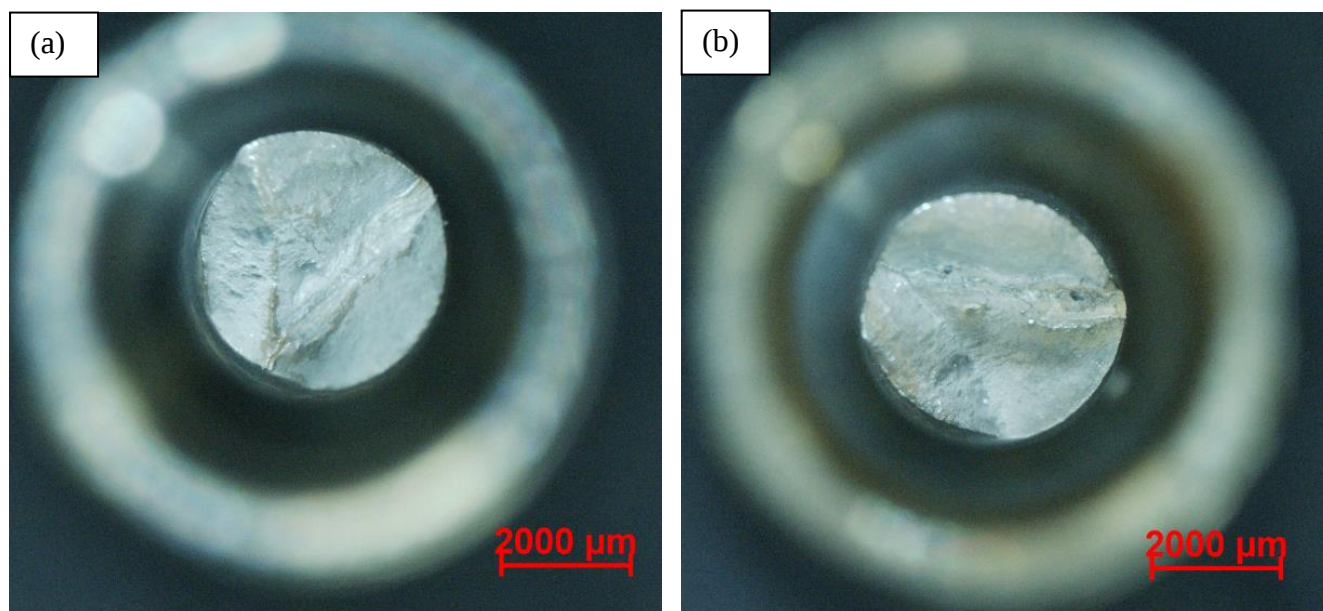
Fracture surface image of the room temperature tensile tested specimen with the appearance of partial ductile (low / limited ductility) morphology with a dull (greyish) colour appearance (a) Fractured half sample (towards X20 PM side, (b) Fractured half sample (towards P91 PM side).
